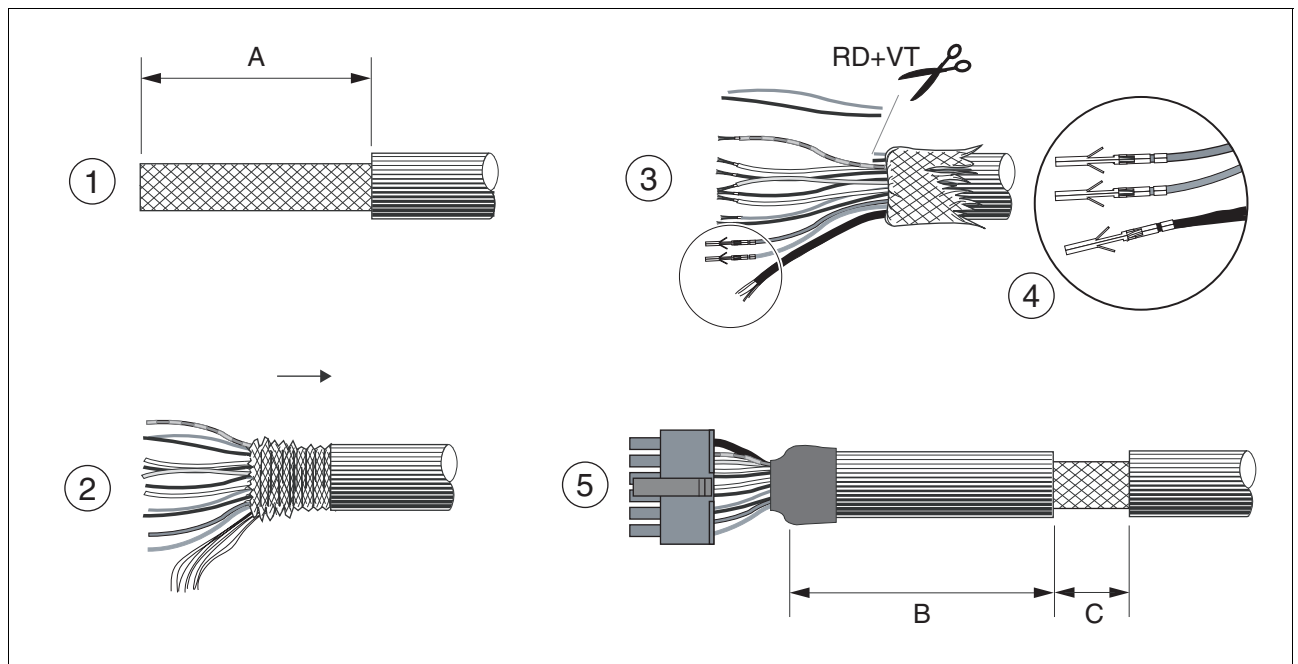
Steps (1-5) for fabrication of the sensor cable
